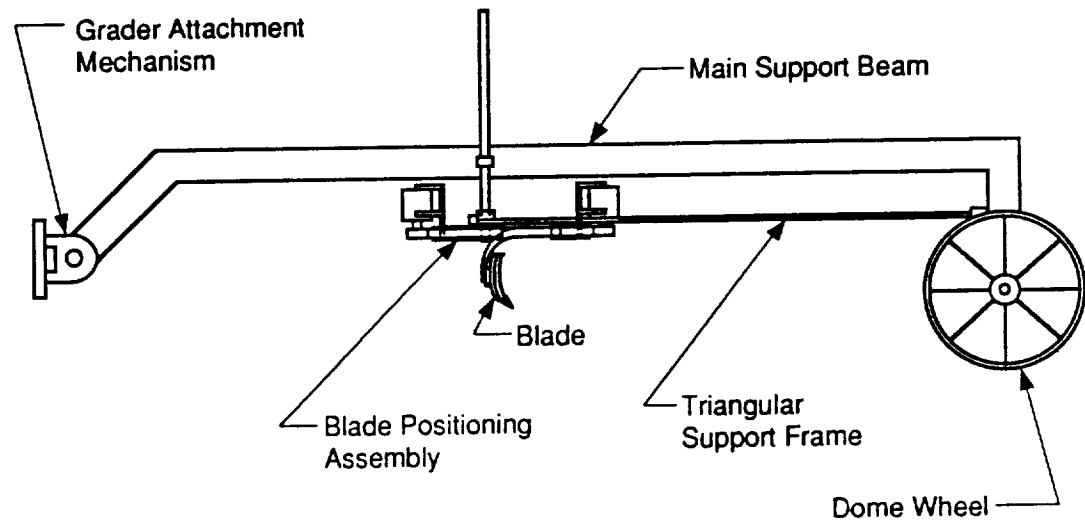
COMPONENTS OF THE GRADER ASSEMBLY
